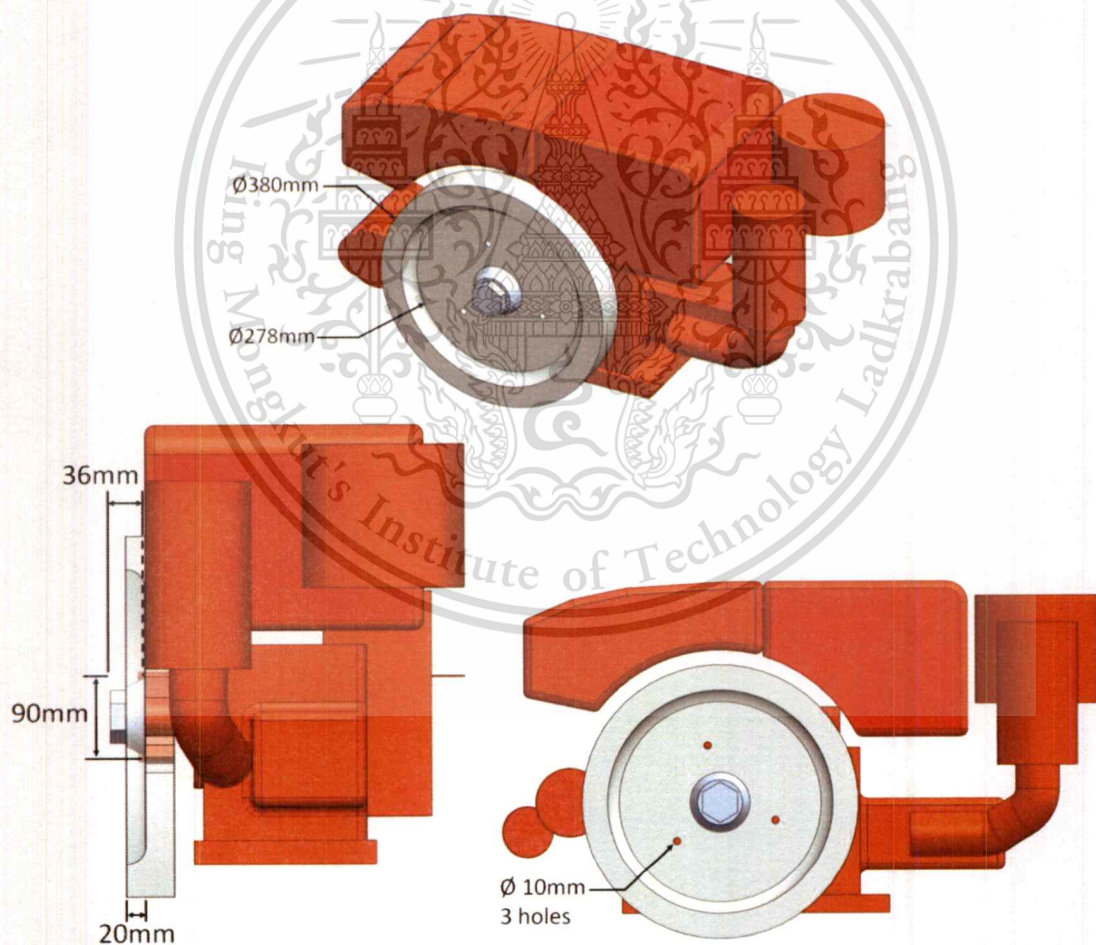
Clutch contact surface design constraints: flywheel geometries (all dimensions in mm)
